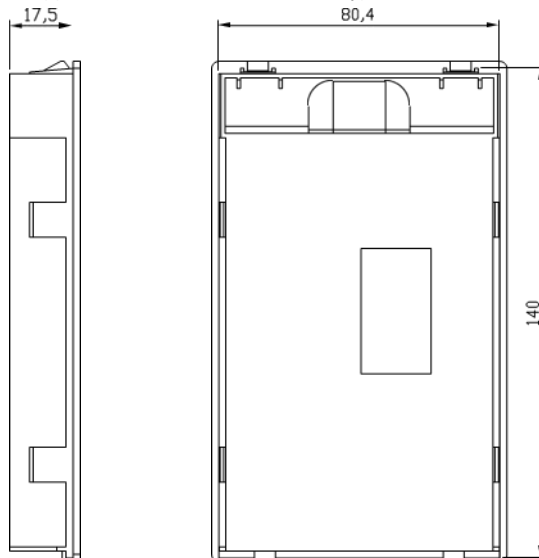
Dimensions of the external keypad bracket of 22kW above (unit: mm)
